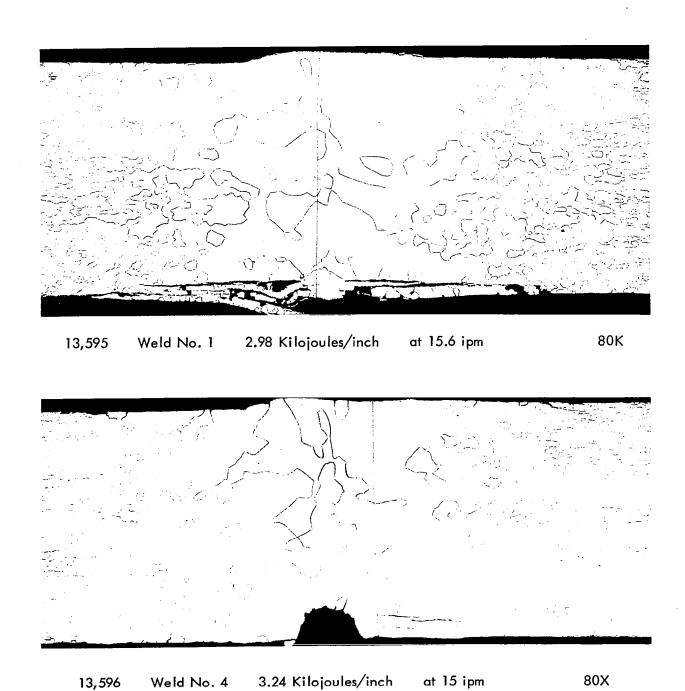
Typical Sections of Electron Beam Welds in Unalloyed Tungsten
